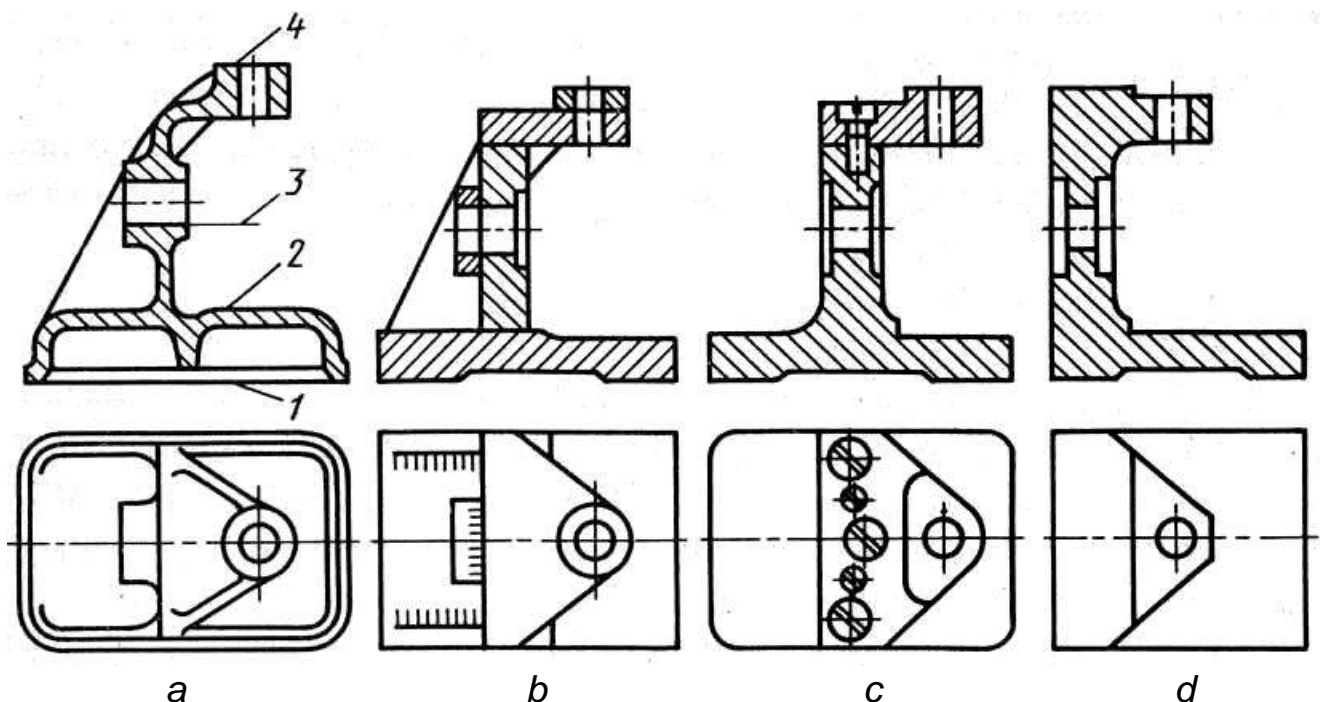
Typical designs of workholding device bodies: a – cast design; b – weld design; c – forged design
